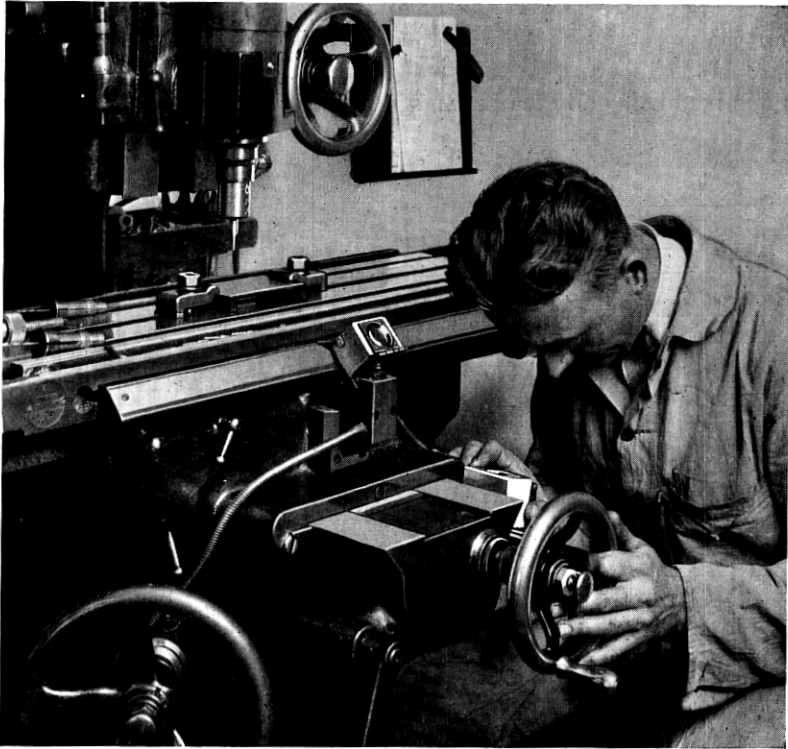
Boring datum holes in master plate on veneer milling machine
